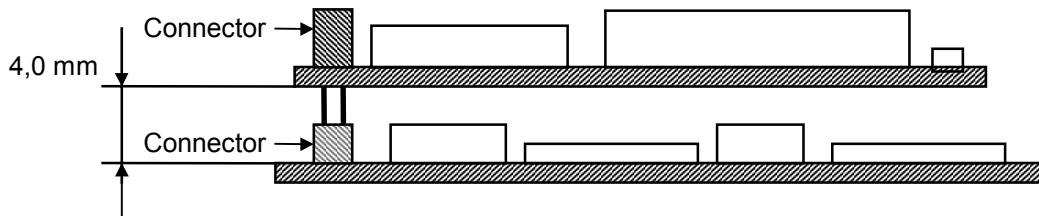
Components fitted on target PCB below HW 86022. Distance between PCBs depend on component heights (here: 4,0 mm)
